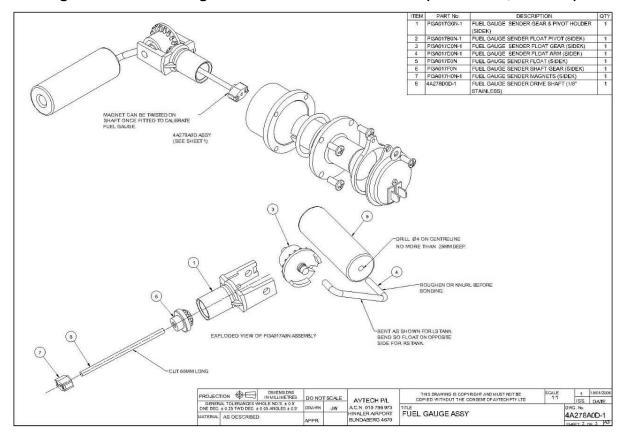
Fuel Gauge - Electric Sender Assembly (all J-Series, n/a J120)
